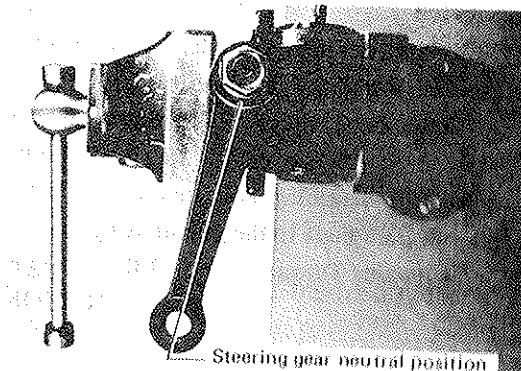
Setting Steering Gear Engagement at Neutral Position
